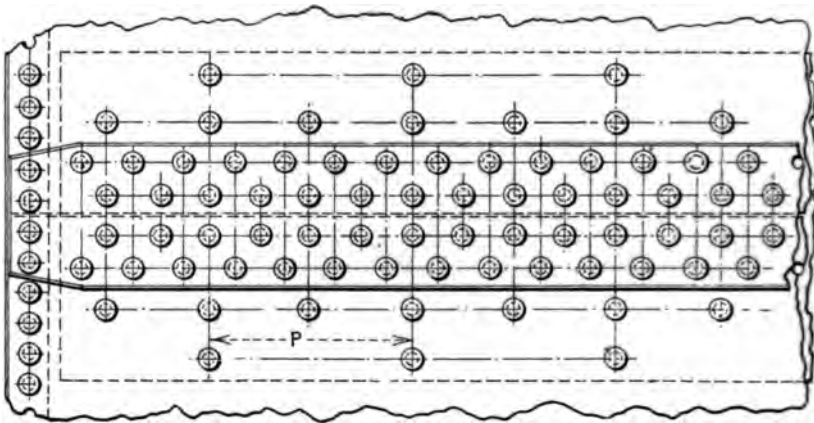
EXAMPLE OF BUTT AND DOUBLE STRAP JOINT, QUADRUPLE-RIVETED
